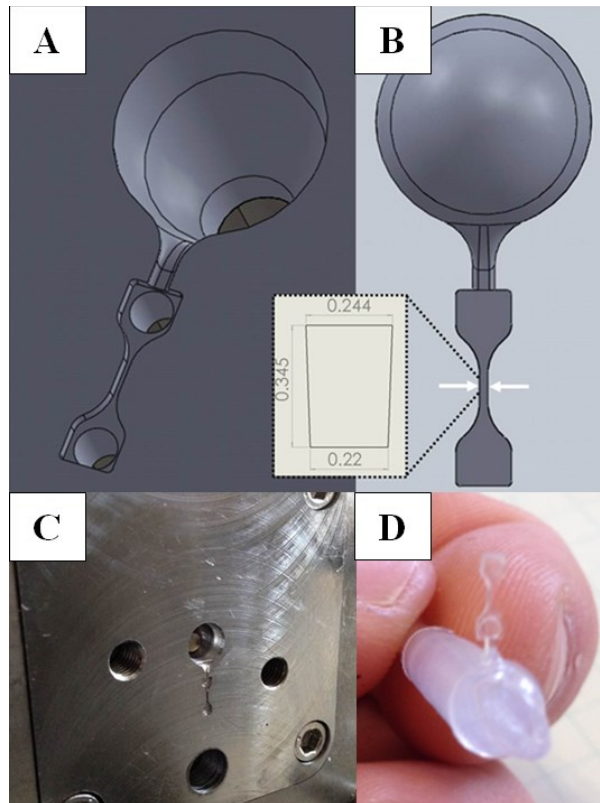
CAD model of micro tensile specimen cavity for trial 2 (A) CAD molded part (B) with designed cross-section (inset; dimensions are given in mm), actual steel insert fixed to moving mold half (C), and actual molded TPU part.
